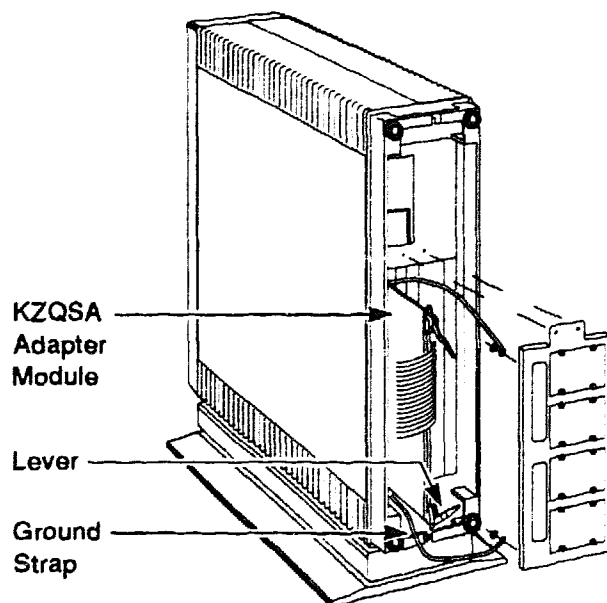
Ribbon Cable Insertion to KZQSA Adapter Module
